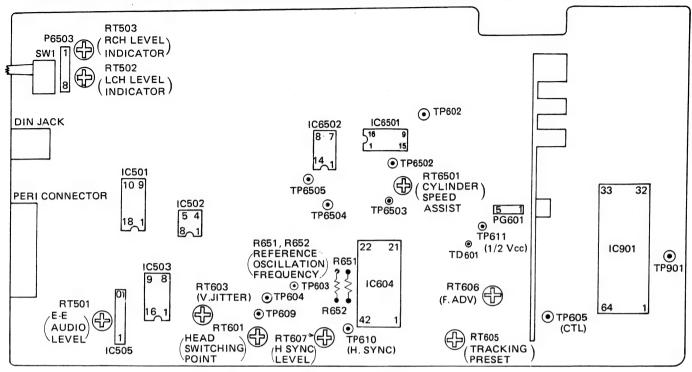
Servo/System Control (Main) P.C. Board (Parts Side)
